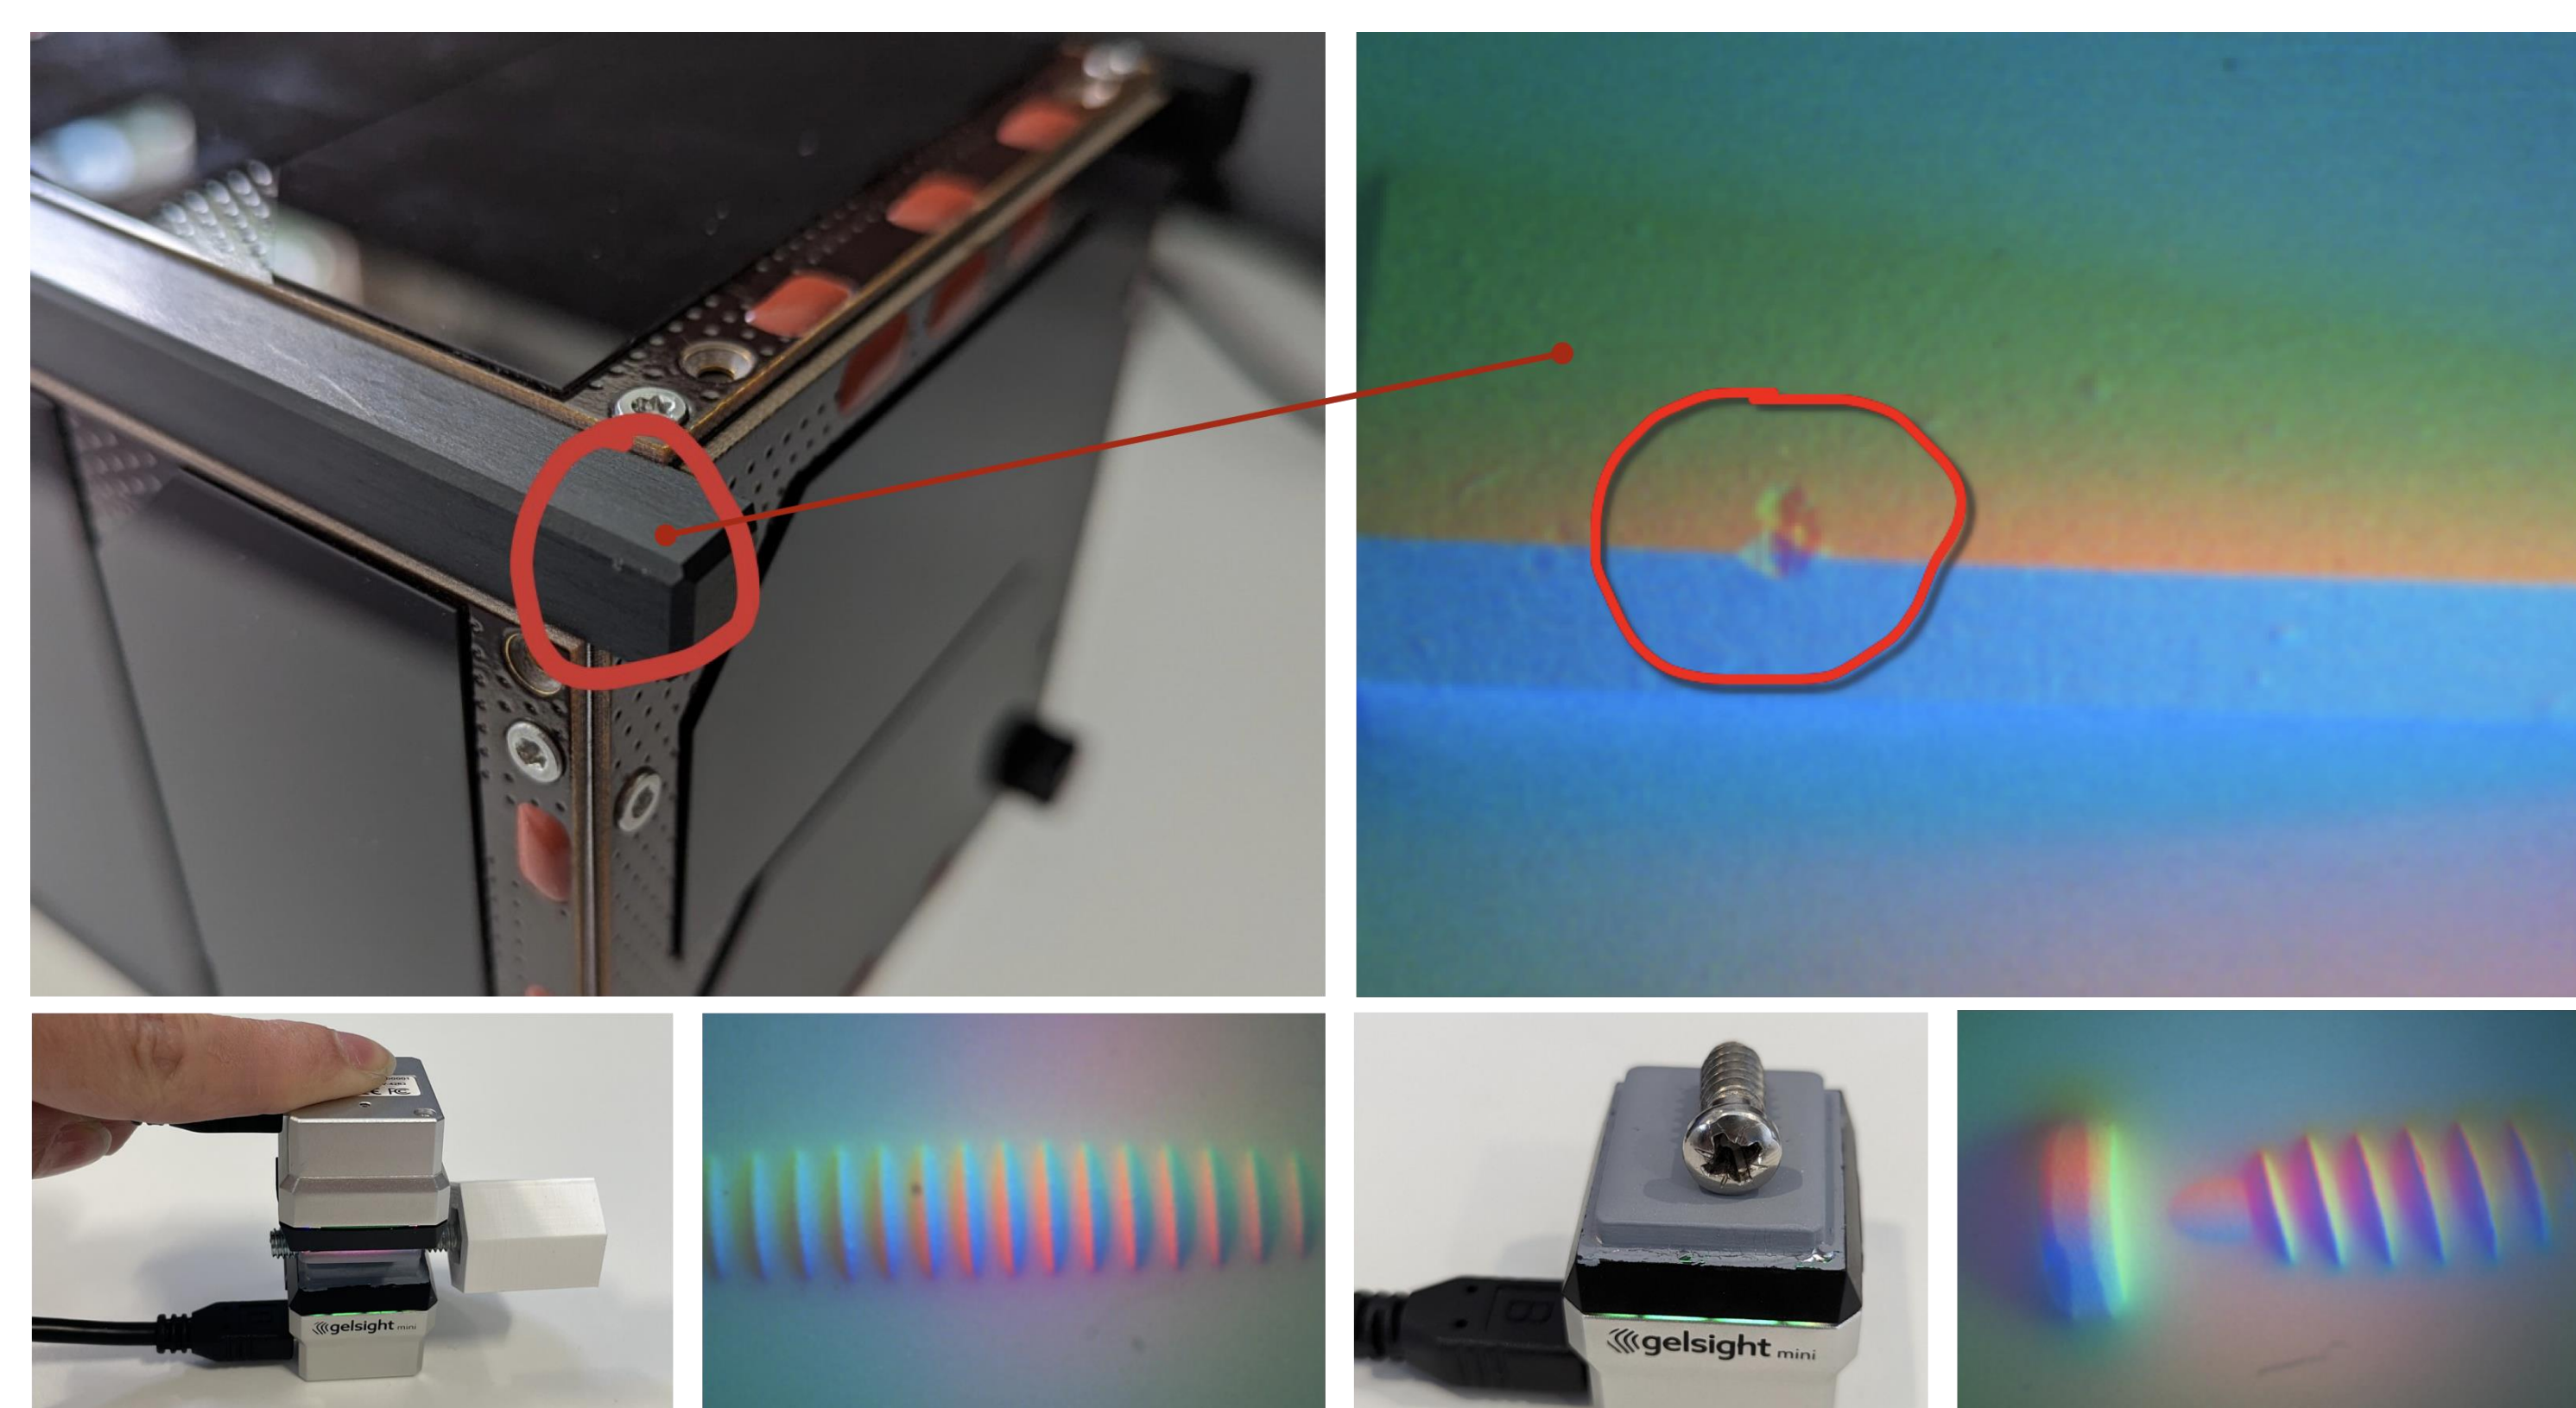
Crack inspections, first row – CubeSat, second row - bolt
